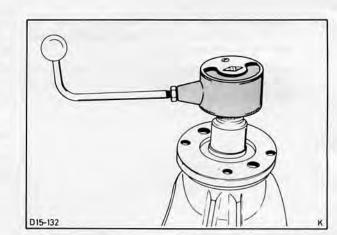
Check running torque of drive pinion with pre-load gauge 15–041
